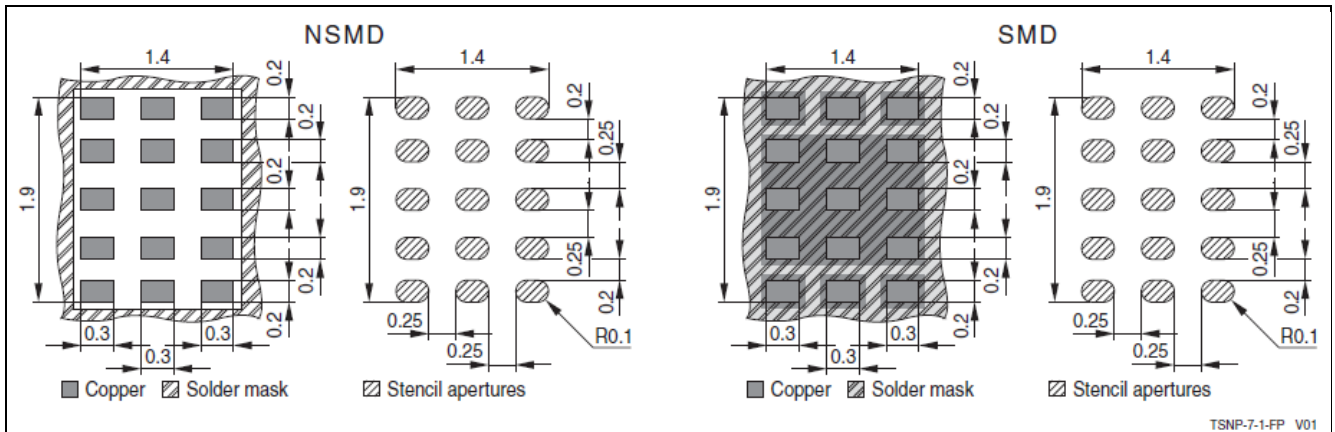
Footprint Recommendation 1 for the BGA777N7 Package
